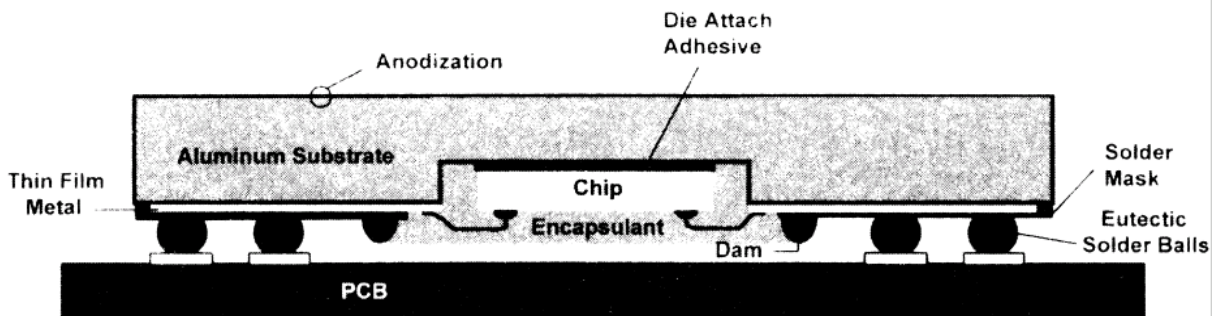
Olin Metal BGA (MBGA) with Wire-Bonding
